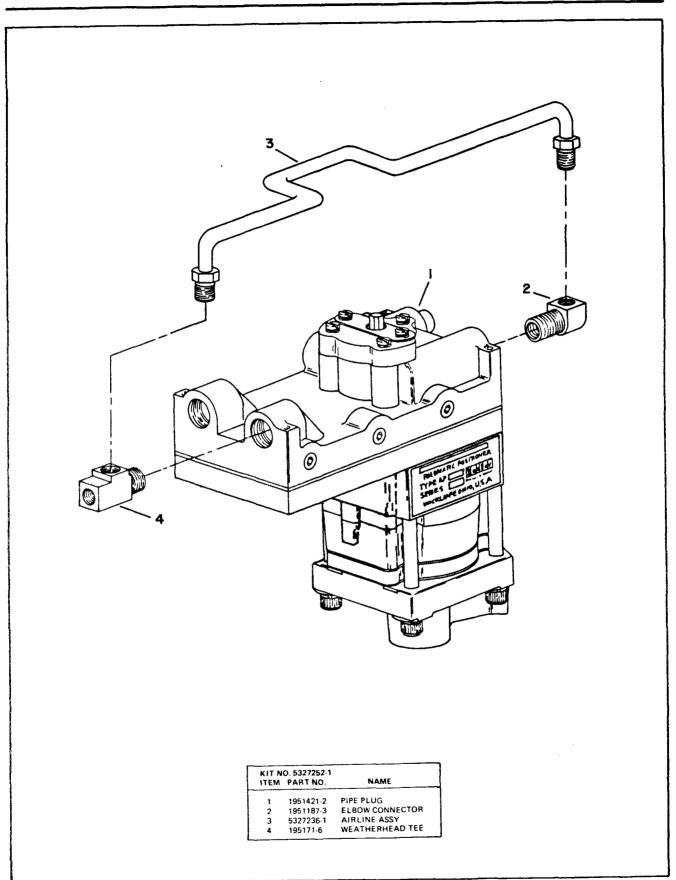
Parts Drawing P88-32, Optional Position Transmitter Conversion Kit, Pt. No. 5327252-1 1.2.23-501
